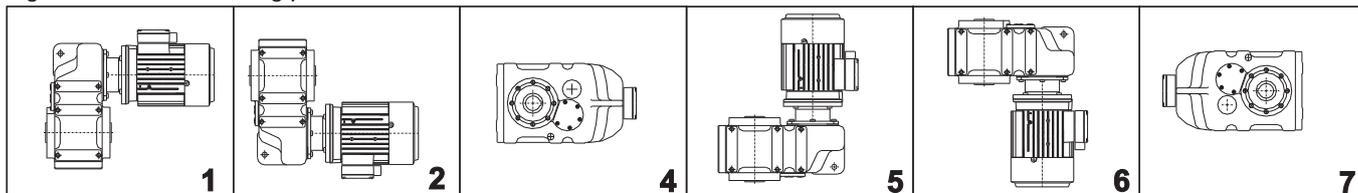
/1 MTC..A/TC..A Mounting positions
